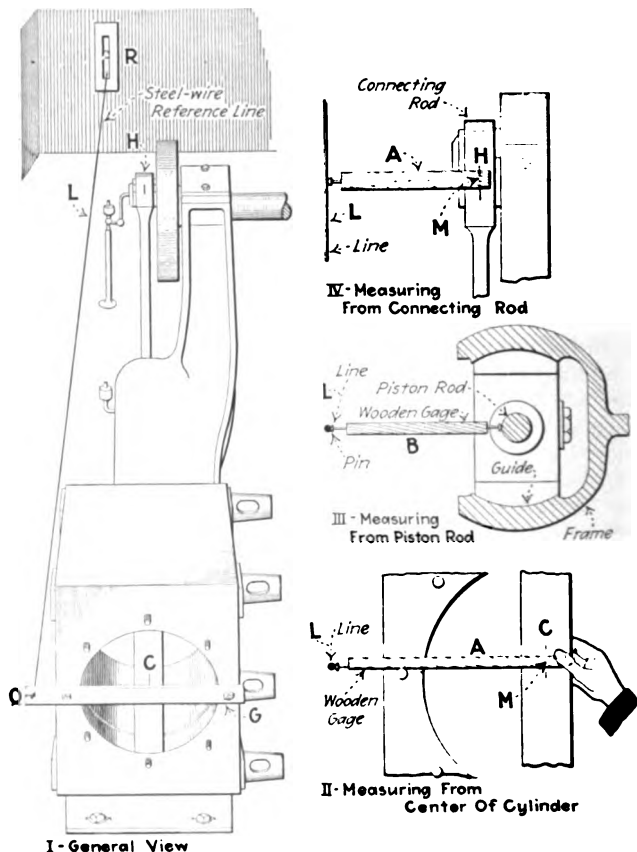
Showing quick method of checking engine alignment. (*Southern Engineer Kink Book.*)
